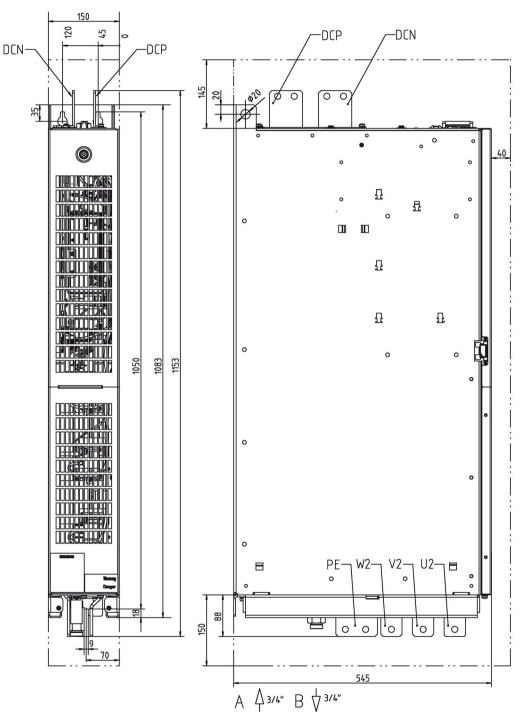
Dimension drawing Motor Module, frame size GXL. Front view, side view
